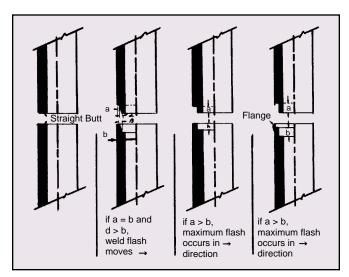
Typical Joint Configurations for Spin Welding (Hollow Members)
